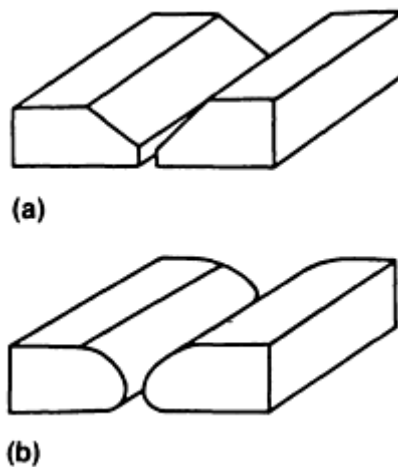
RECOMMENDED GROOVE CONFIGURATIONS FOR JOINING CAST IRONS. (A) ARC WELDING. (B) BRAZE WELDING. SOURCE: REF 1
